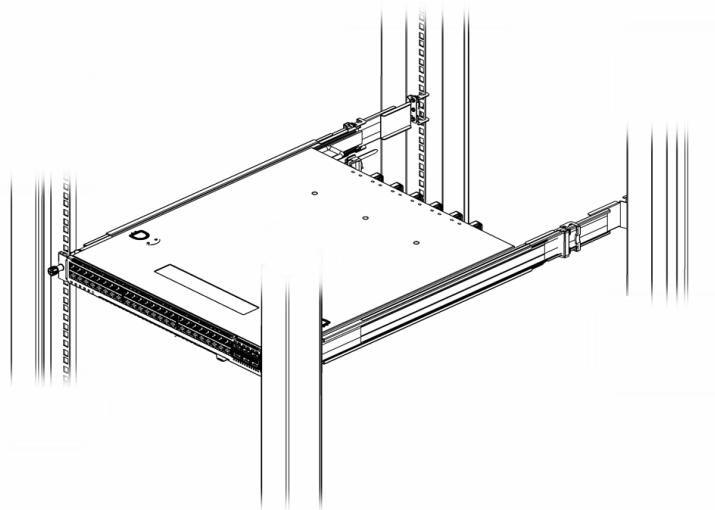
Engaging the Mounting Brackets with the Rail Assemblies
